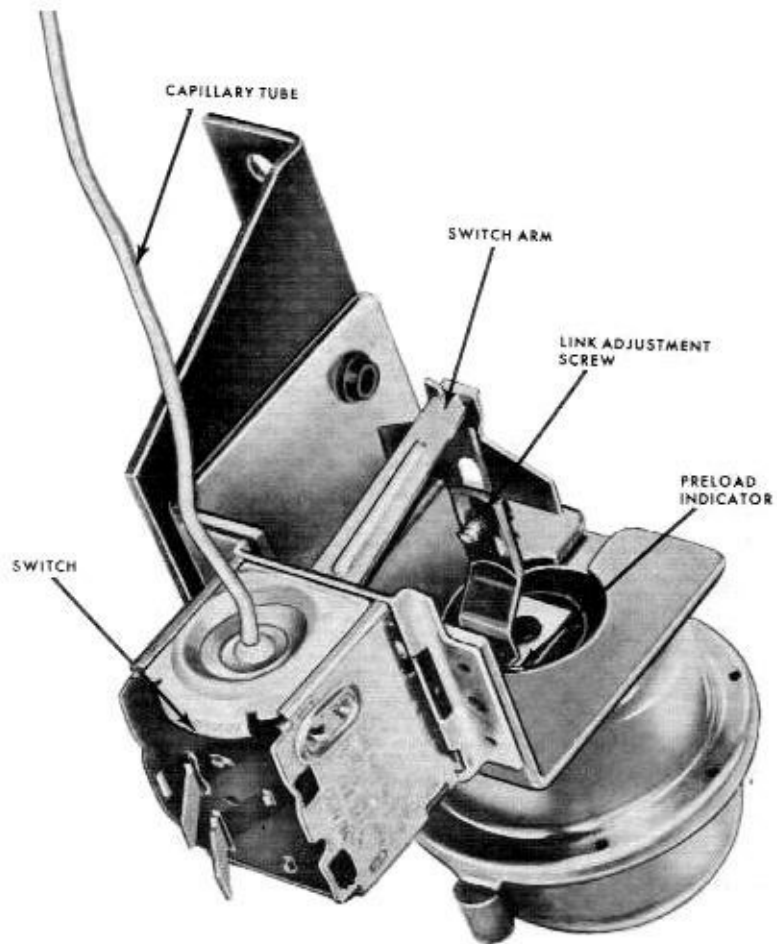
Thermostatic Switch Adjustment—(61LM-7807)
